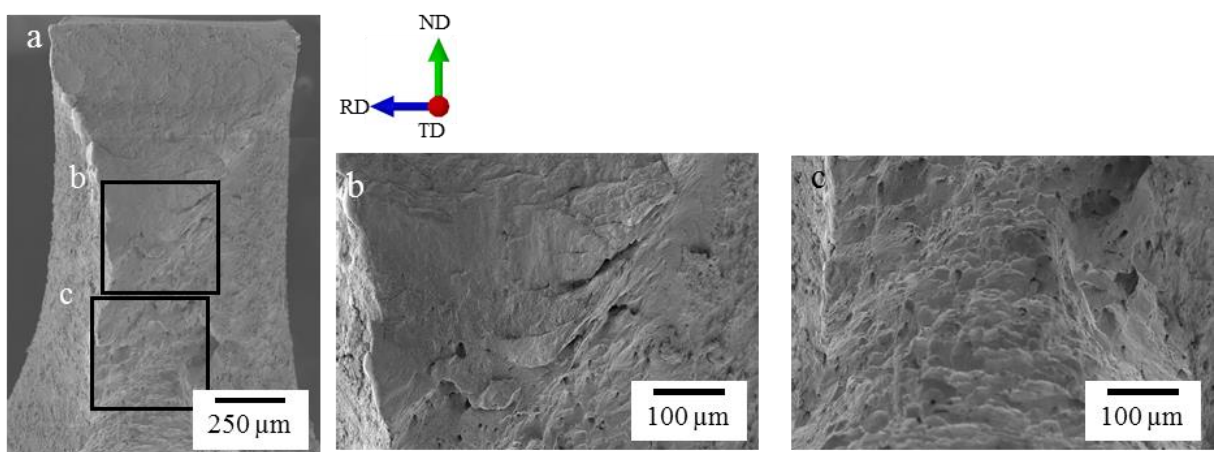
Fractographies of an annealed Cu-25%Zn sample tested using the 3-point bending test at a displacement rate of 0.05 mm/min in contact with the EGaIn.
